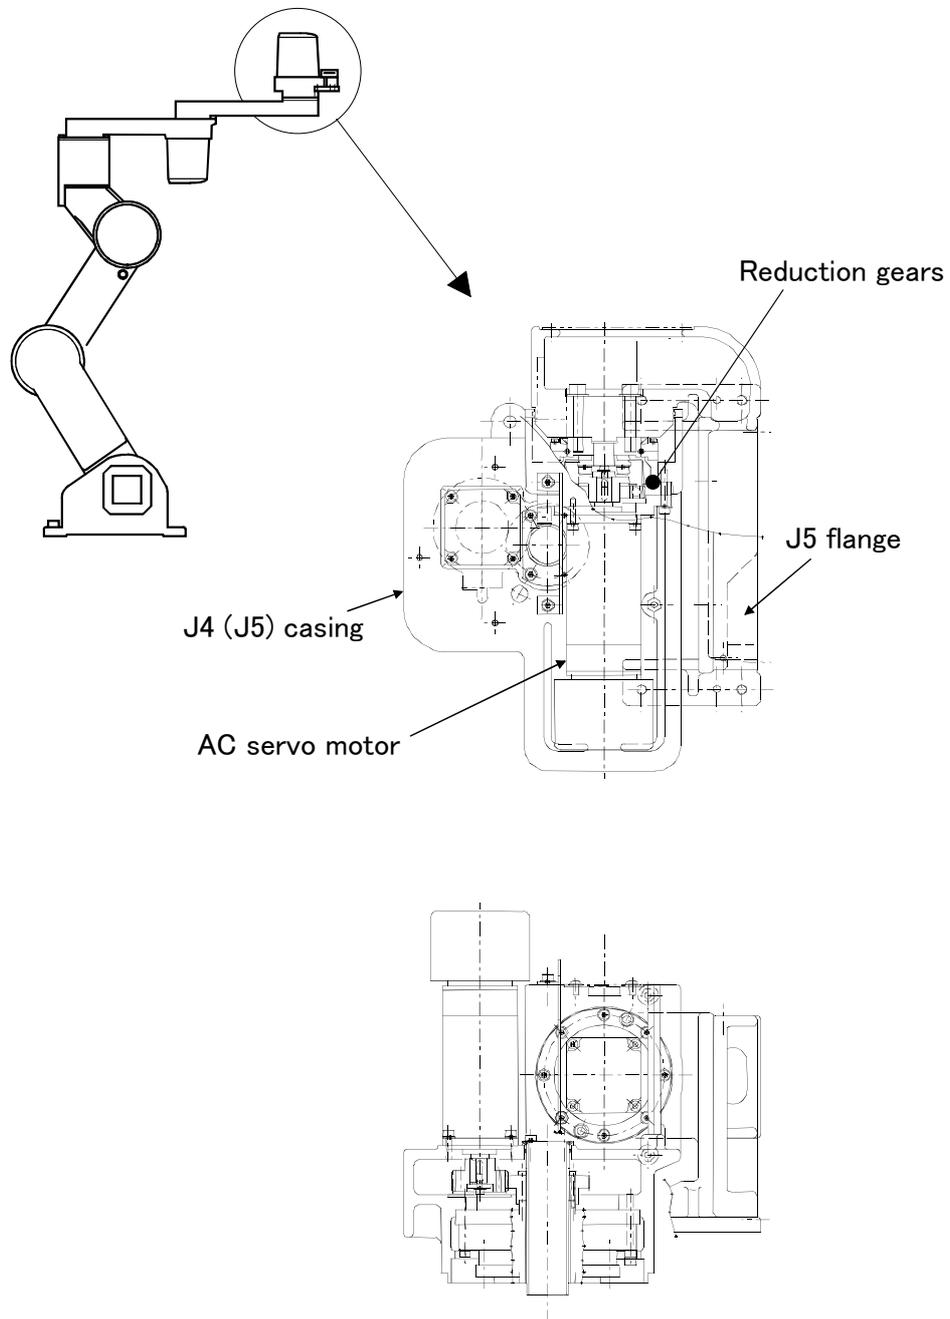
J5 axis drive mechanism (RH-1000GJLC-SA)
